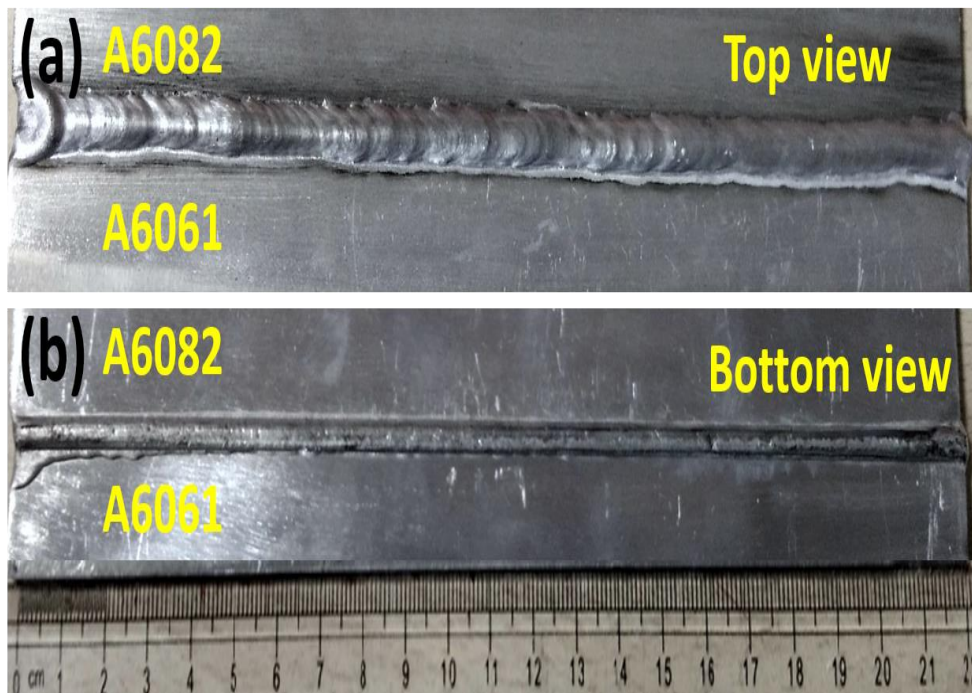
Surface appearance of the CMT welded A6061-T6 and A6082-T6 joint using ER5356 filler wire (a) Top view and (b) Bottom view
